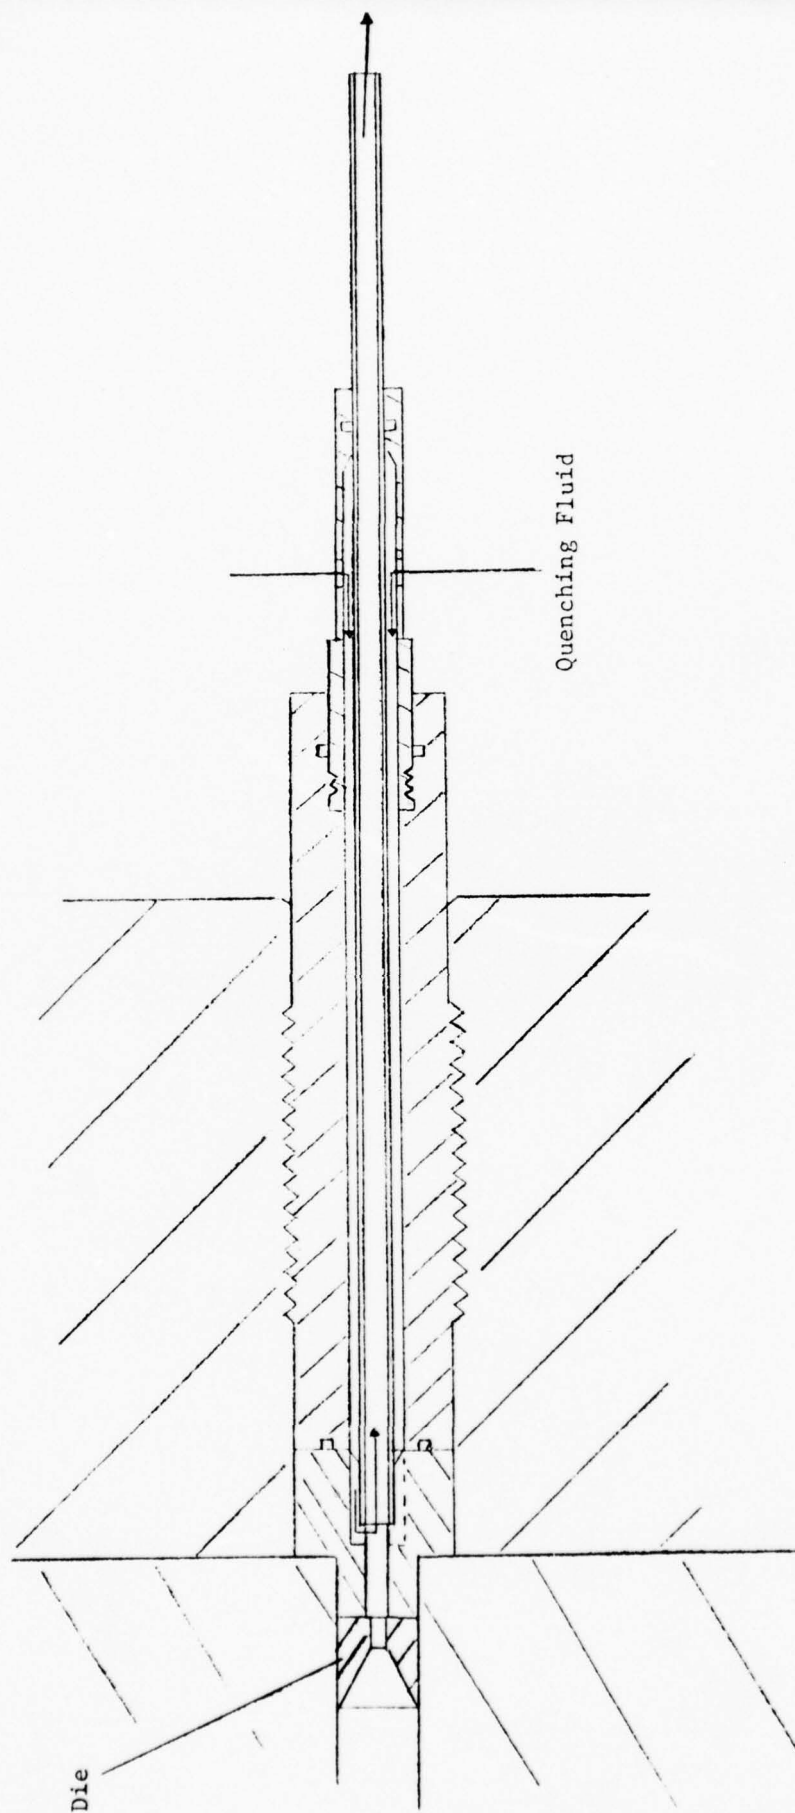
Quenching system for direct extrusion mode. Extruded billet and fluid exit through center tube.
